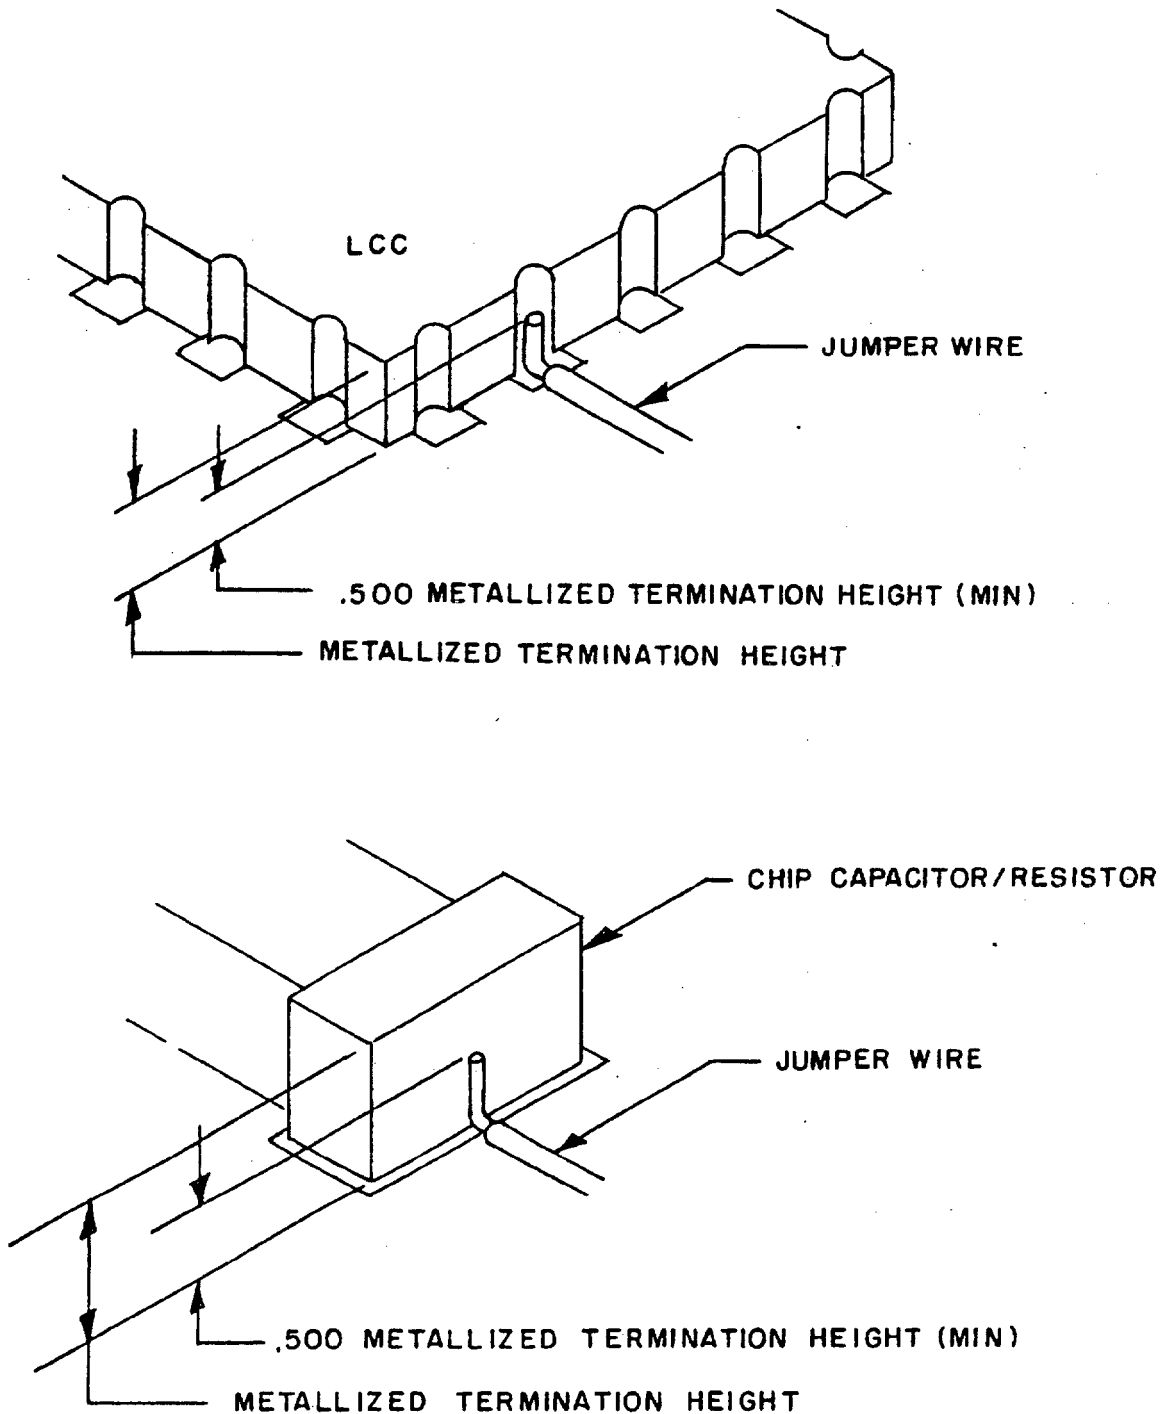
Jumper wire contact length/height to surface mounted devices.
